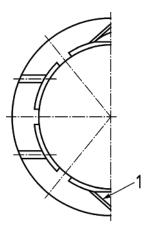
Type of transition between half bearing and flange of a assembled flange bearing
